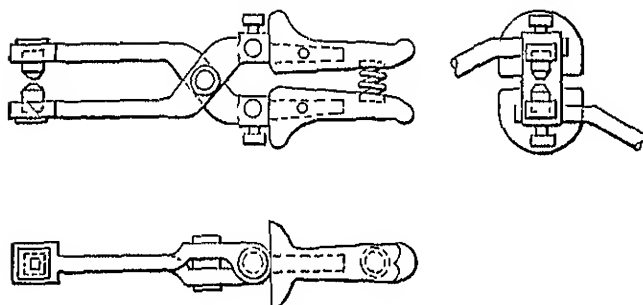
The DeBenardo Carbon Electrode Spot Welding Apparatus.
